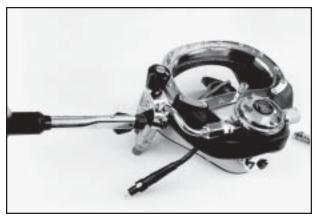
Remove the plug from the side block to install the low pressure hose.
